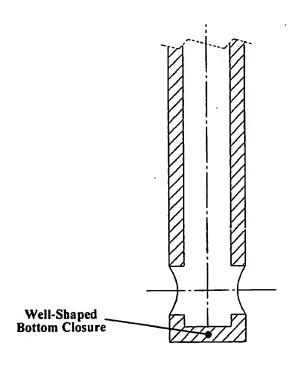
Section View of a Casting Nozzle : with Well-Shaped Bottom Closure
